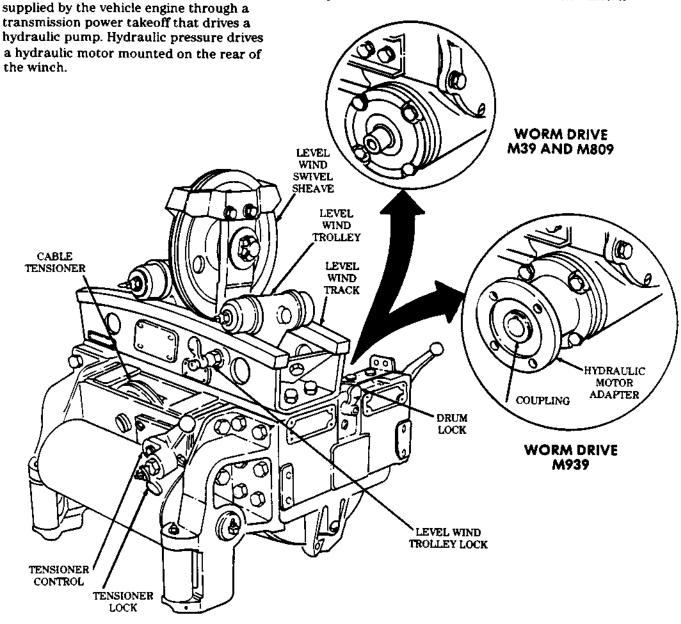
Front Winch Assembly (With Level Wind and Cable Tensioner) (M39, M809, and M939 Series Vehicles).
